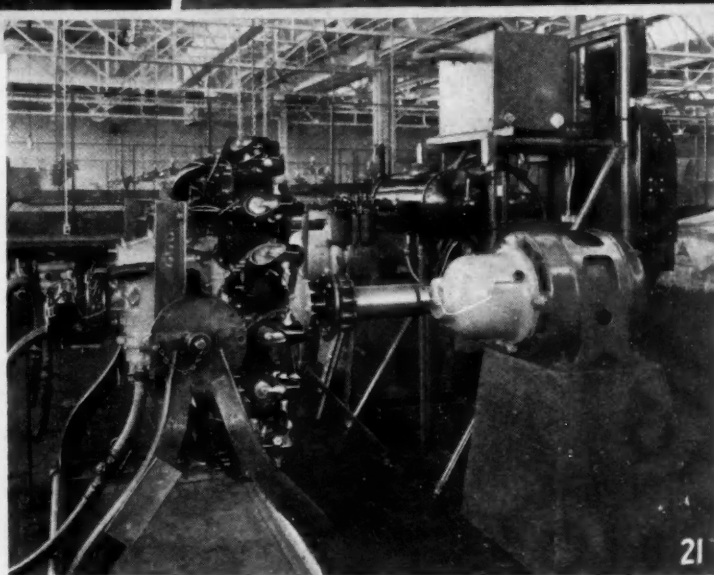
Special Running-In Stand for Cold-Running the Assembled Engines
